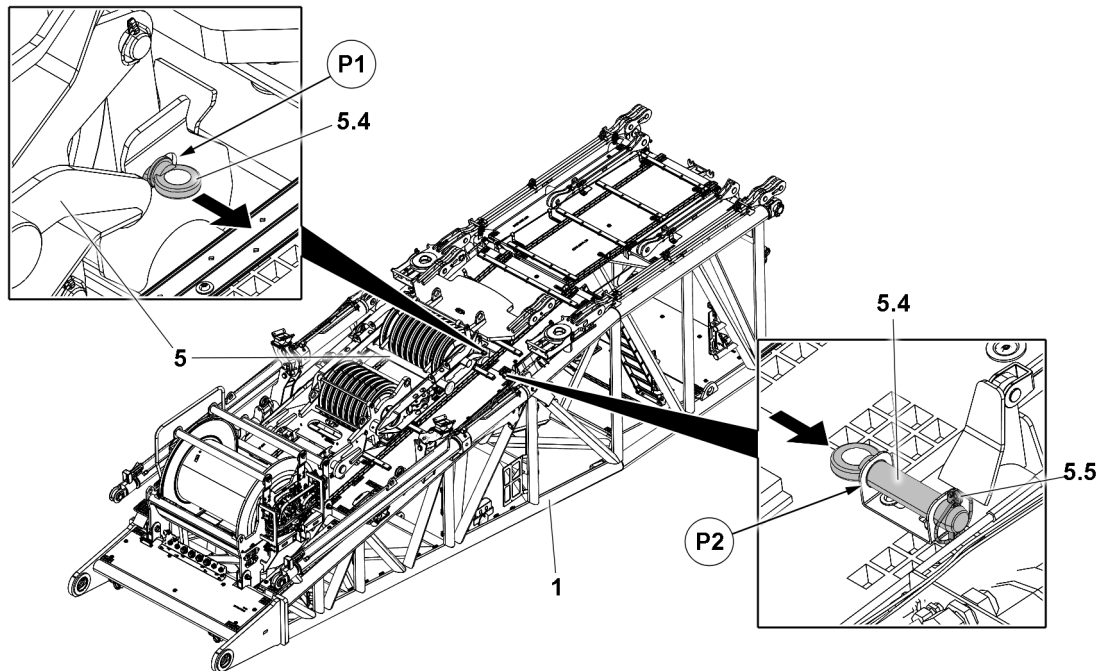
Preparing the S-luffing pulley block for assembly (variation with removable winch 3)
